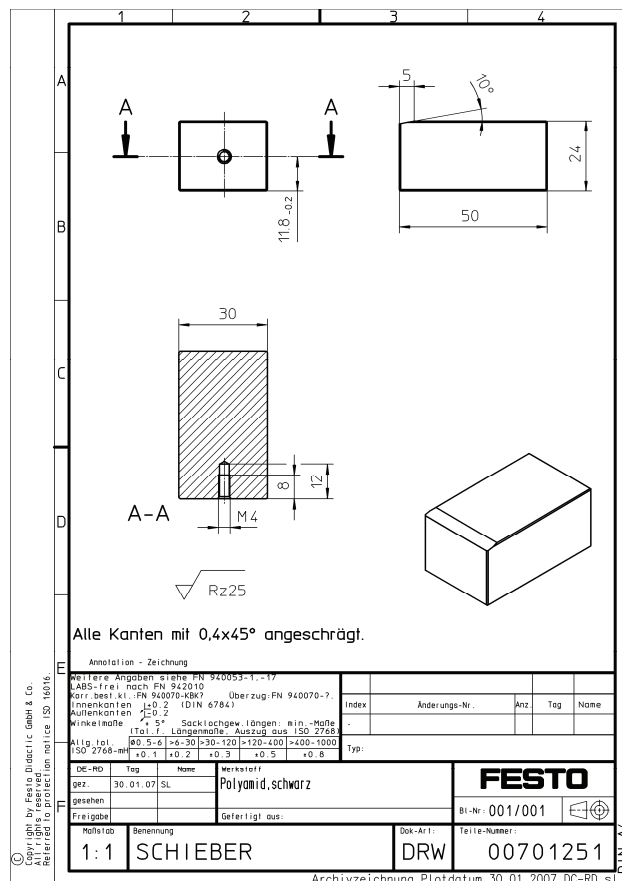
Dimensional drawing of the slide from the stacking magazine (original size A4)
